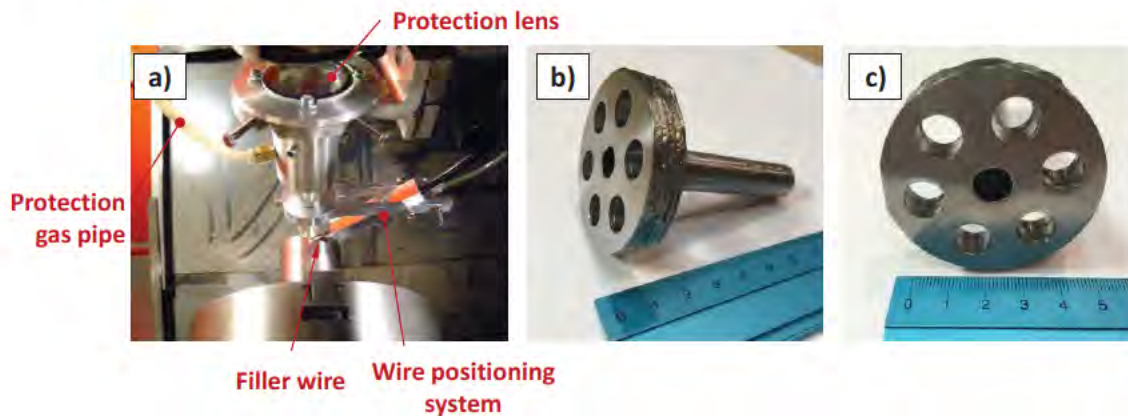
a) Designed wire-LMD nozzle; b) Flange built in AISI 316L; c) Front view of a flange built in AISI 316L.
